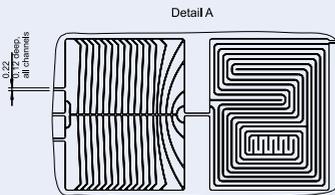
Detail drawing of phase guide mixer chip Fluidic 533
